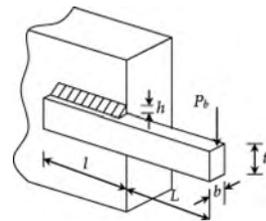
Schematic view of welded beam design problem case A [49].
